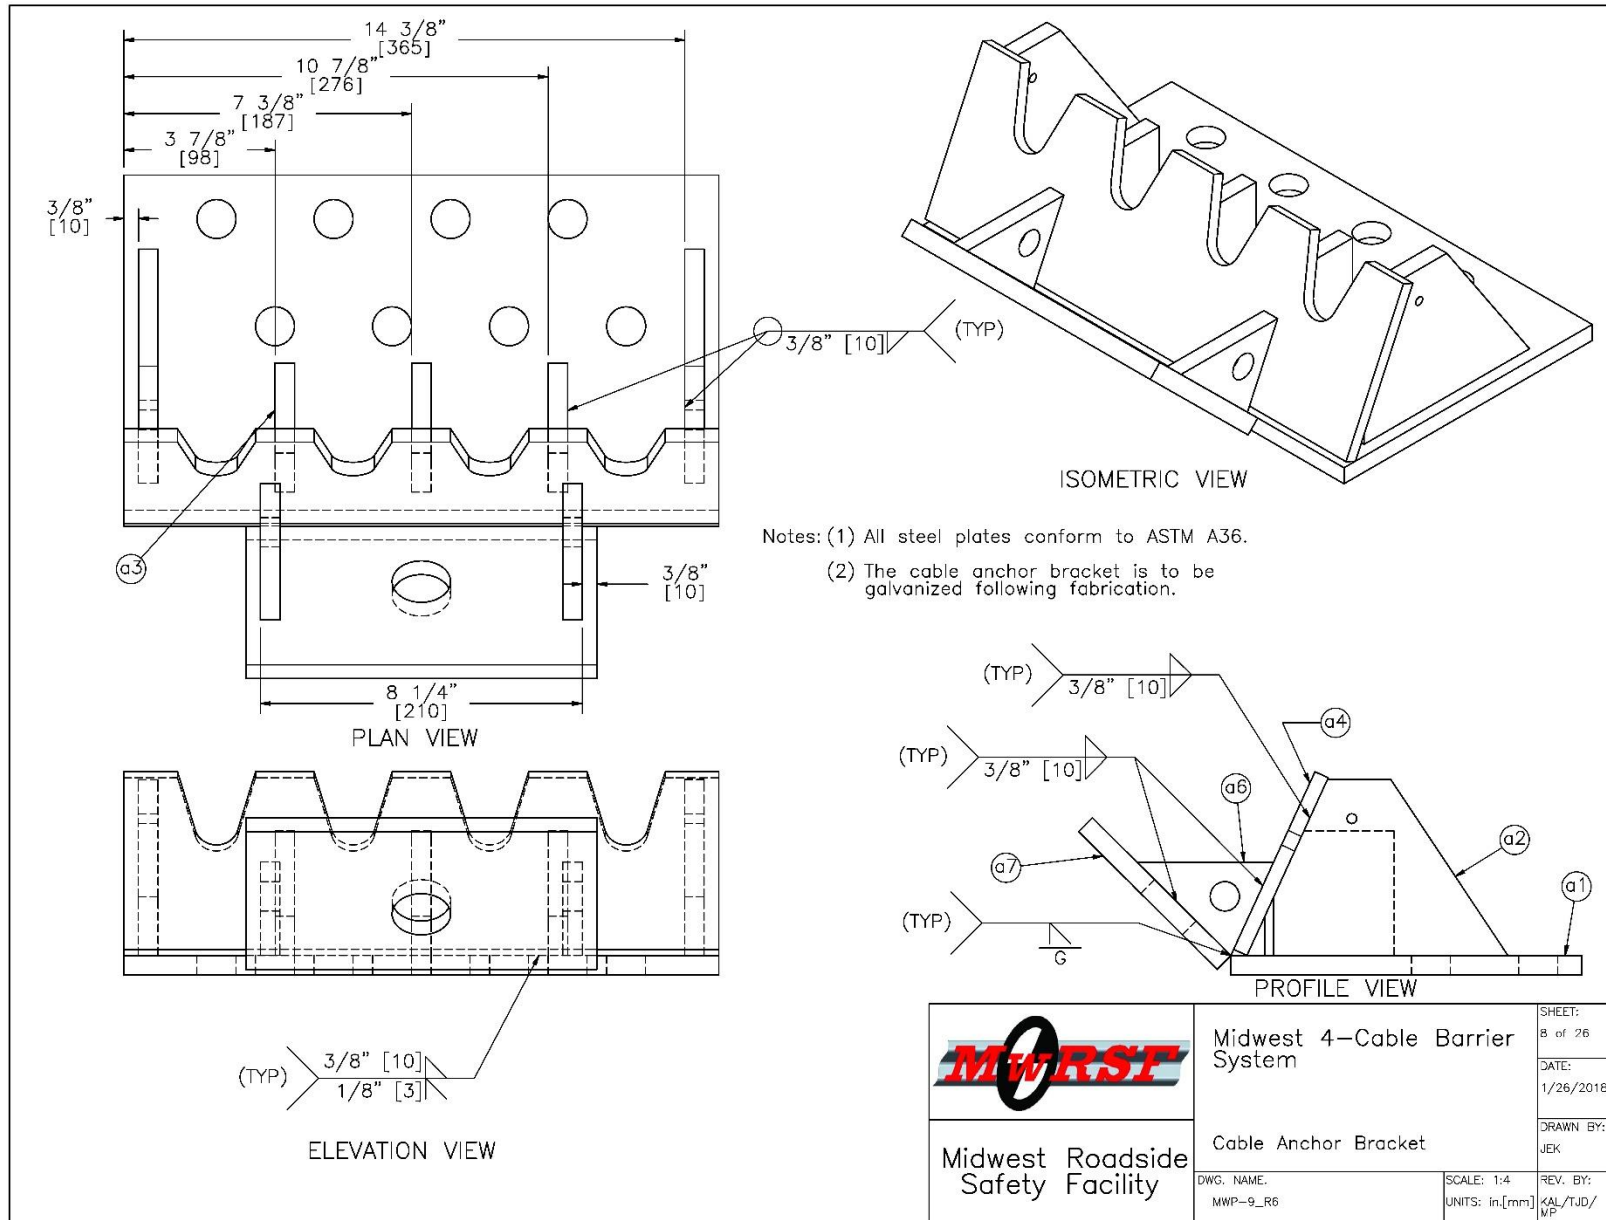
Cable Anchor Bracket, Test No. MWP-9
